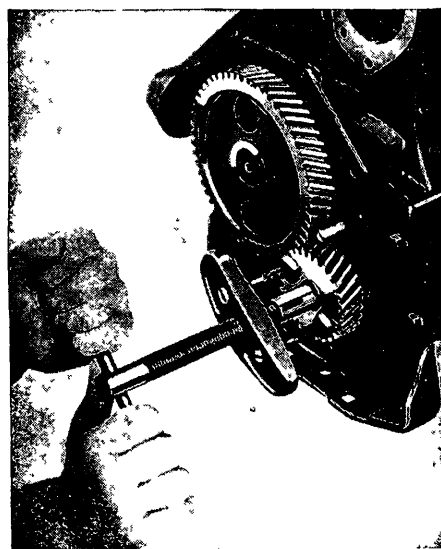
Using puller to remove crankshaft gear. 1935-52
